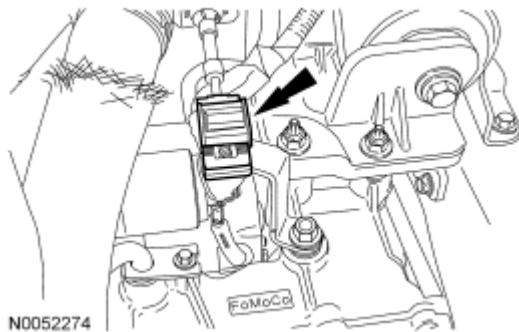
Locating Selector Lever Cable End From Manual Lever
